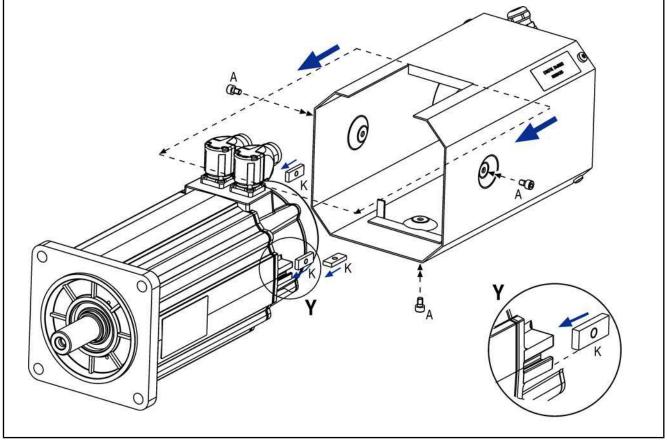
Assembly of fan units LEM-AB-116N-xx-NNNN, LEM-AB-140A-xx-
